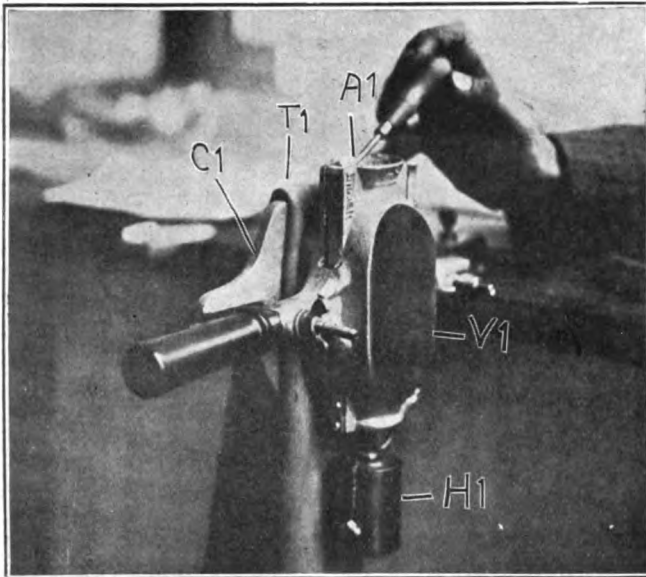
Vulcanizer clamped into place; adjusting the thermostat for the proper control of the heat
